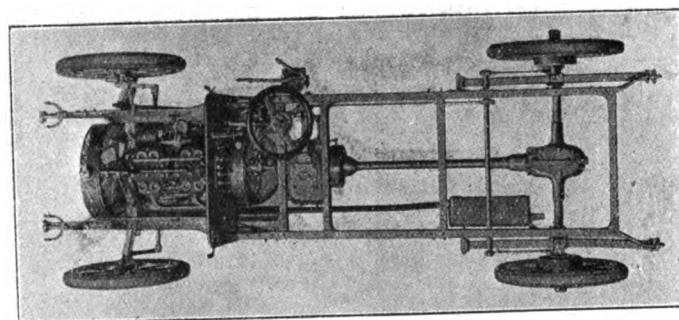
Plan of Chassis of Stella 14-18-h.p. Car.
